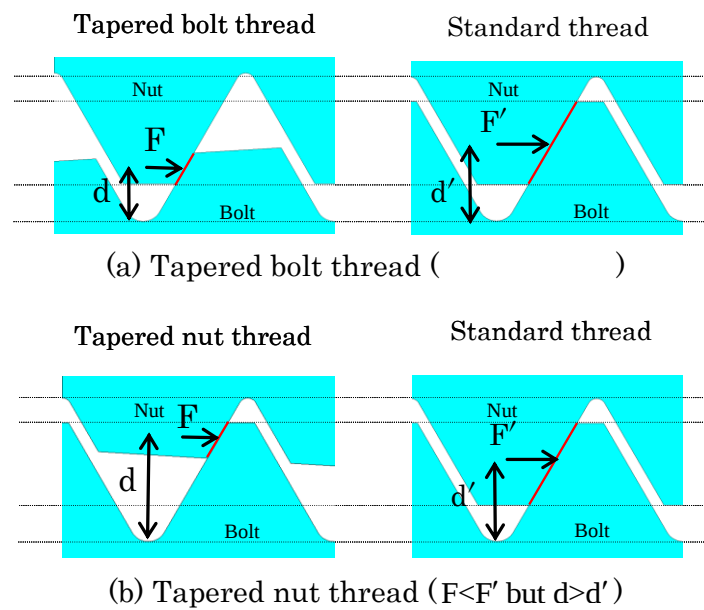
Comparison of standard thread and tapered thread on thread profile
